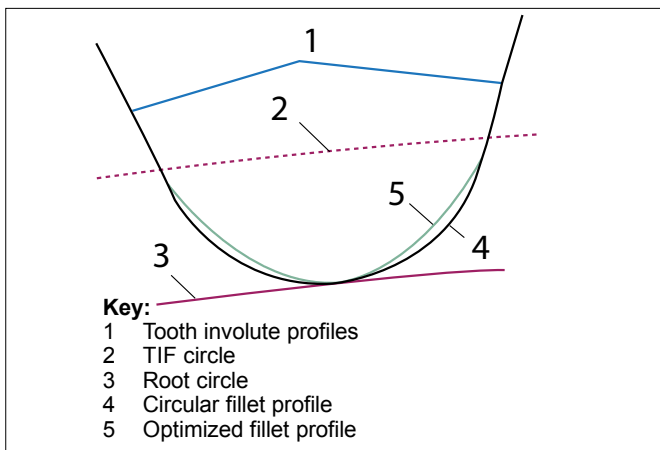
Comparison of circular fillet and optimized fillet geometries. Key: 1 = Tooth involute profiles; 2 = TIF circle; 3 = Root circle; 4 = Circular fillet profile; 5 = Optimized fillet profile.
